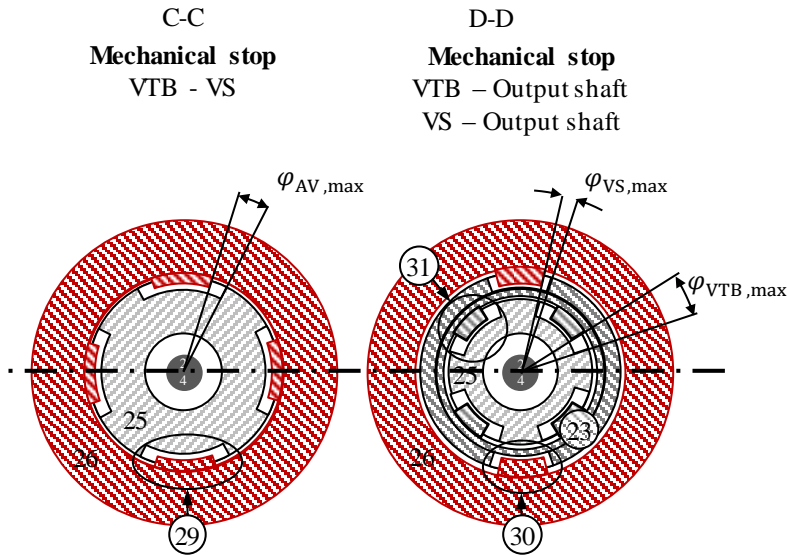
Mechanical stops of active valve<sup>149</sup>
